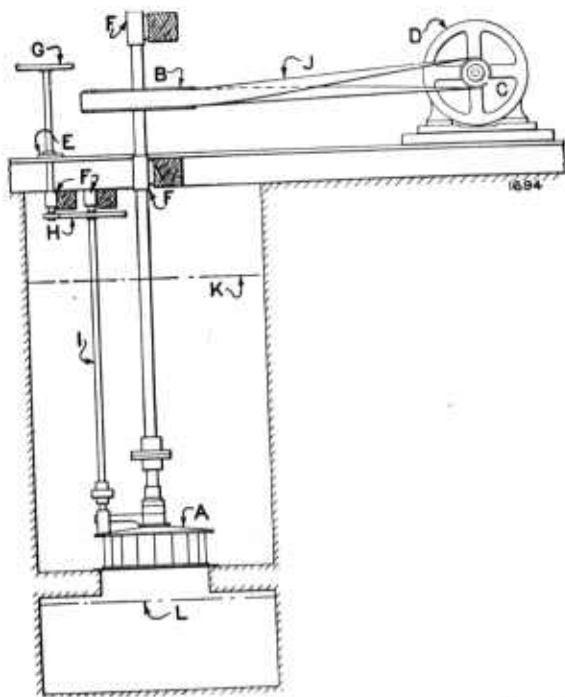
Vertical reaction turbine belted direct to generator with hand control. A, turbine; B, drive pulley; C, generator pulley; D, generator; E, ratchet and pawl; F, bearing; G, handwheel control; H, gears; I, gate shaft; J, belt; K, headwater level; L, tail-water level
